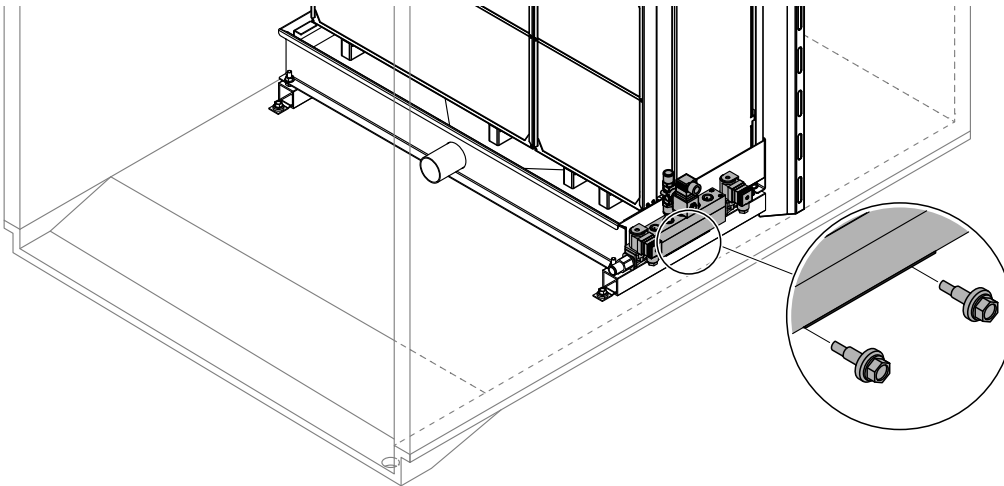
Mounting the Hydraulic Module of ME Direct Feed System (external installation)
